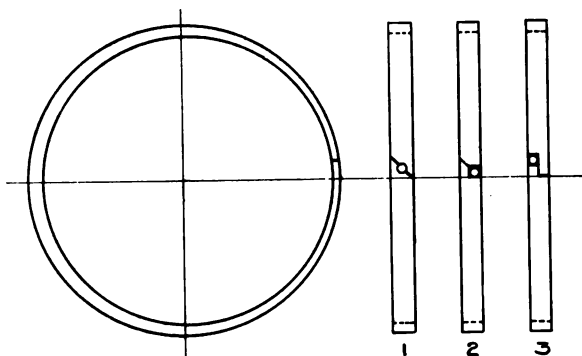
METHODS OF CUTTING PISTON RINGS.
